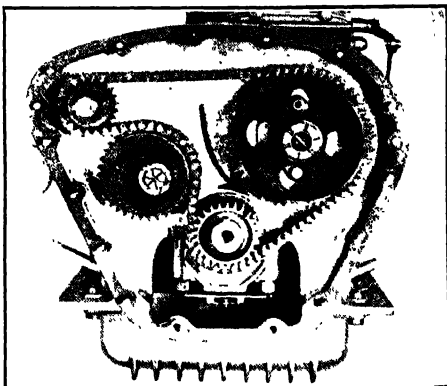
Showing Method of Marking Sprocket Gears.
